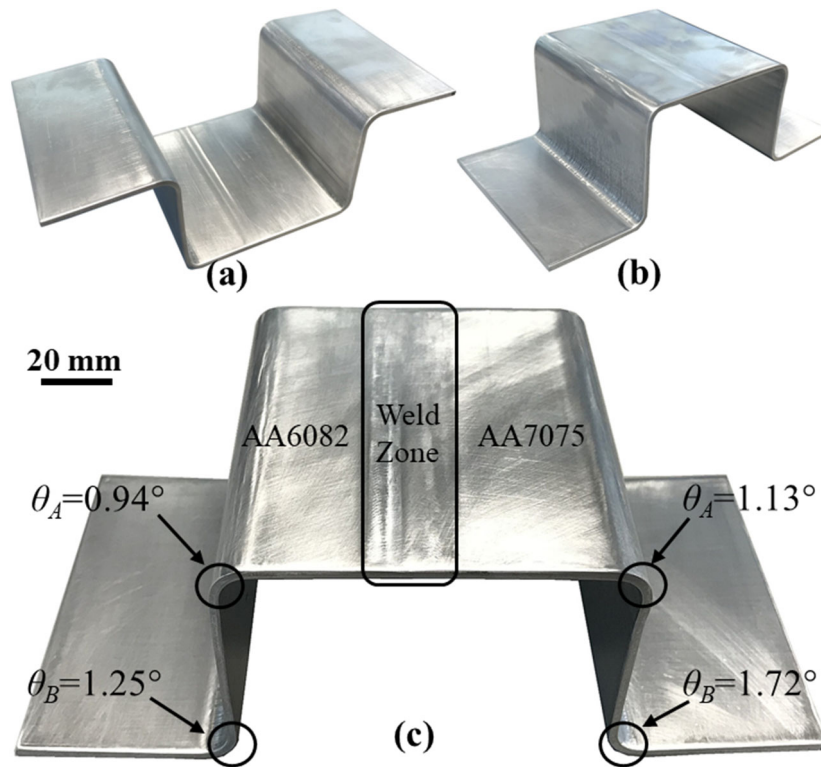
Schematic diagram of formed component (a) isometric view (b) reverse view and (c) front view with springback angles.
